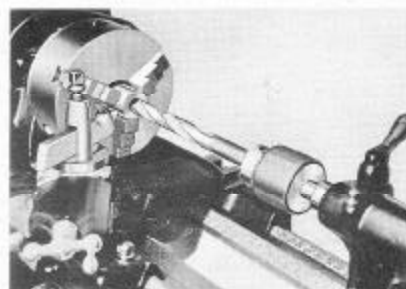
Drilling Hole in Bushing. Drilling of All Kinds can be Done in the Lathe.
